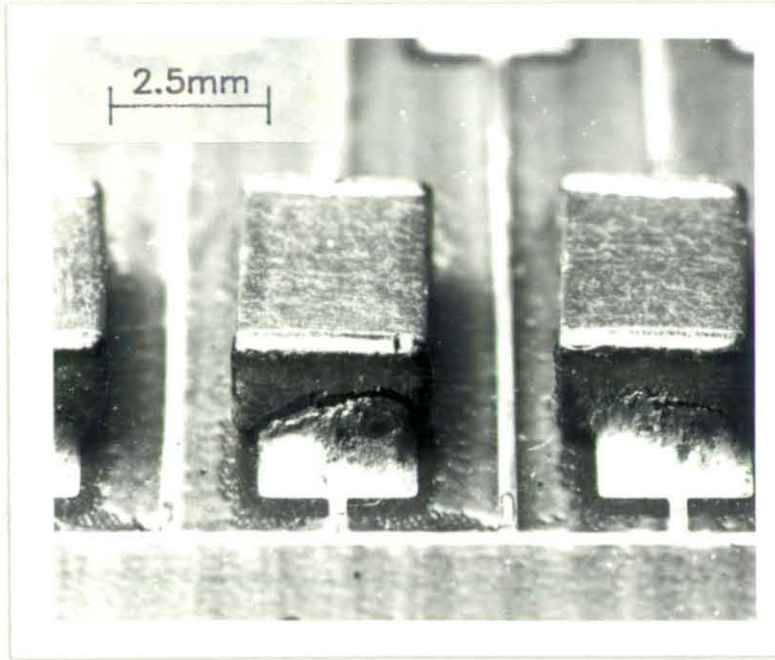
Solder Fillet Cracking in -55 to + 125°C Test on 1812
